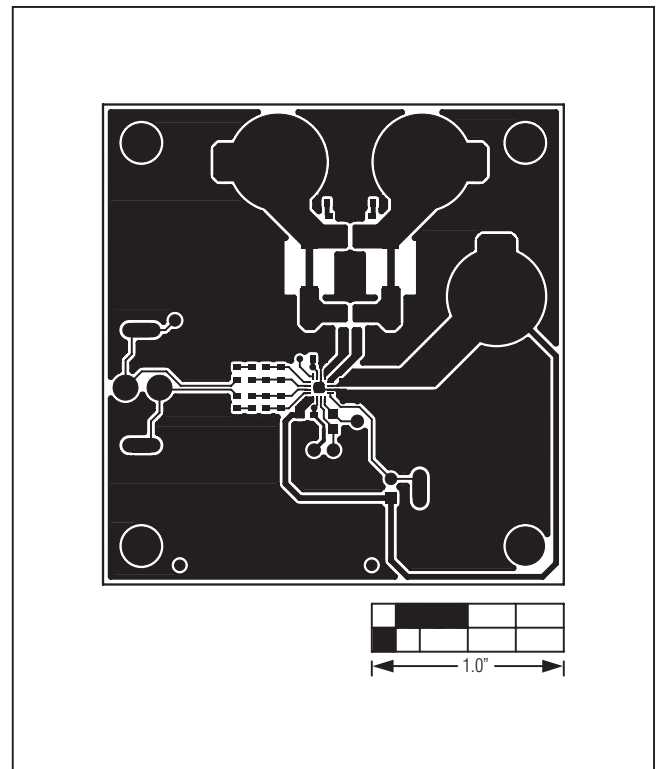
MAX98307 EV Kit PCB Layout—Component Side
